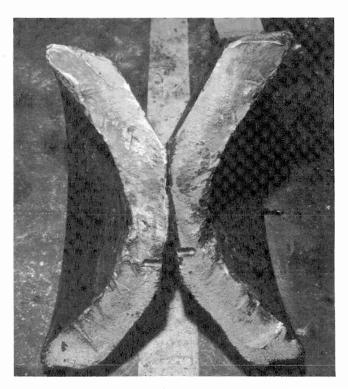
Fracture Surfaces of a Crosshead Failure Showing the Initiation Point on the Concave Surface at the Upper End. The material was specified to be ductile cast iron, but was determined to be mixed ductile-gray iron with reduced mechanical properties.
